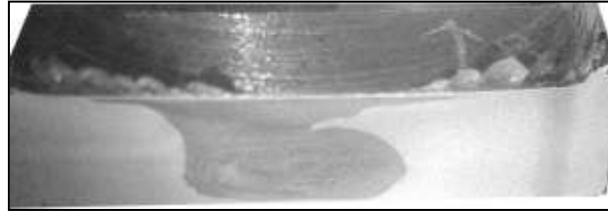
Macrograph of a SP friction stir weld transverse cross-section illustrating the distinct weld zone. Welding direction is inward and the right hand side is the retreating side.
